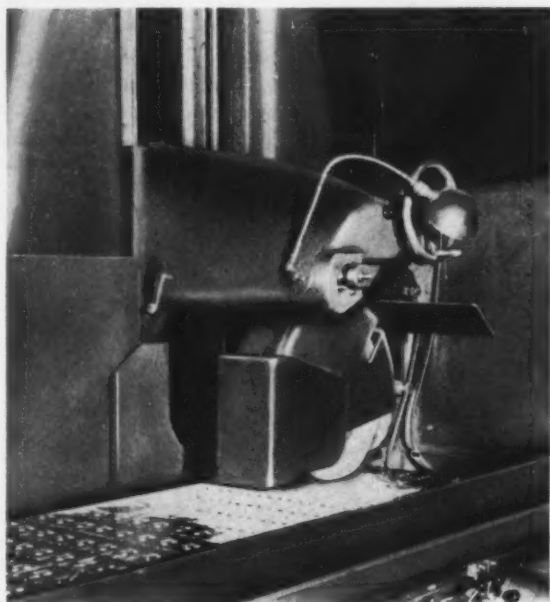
Surface grinding safety deposit box doors made from 0.500-in. stainless steel. Courtesy Mattison Machine Works.
